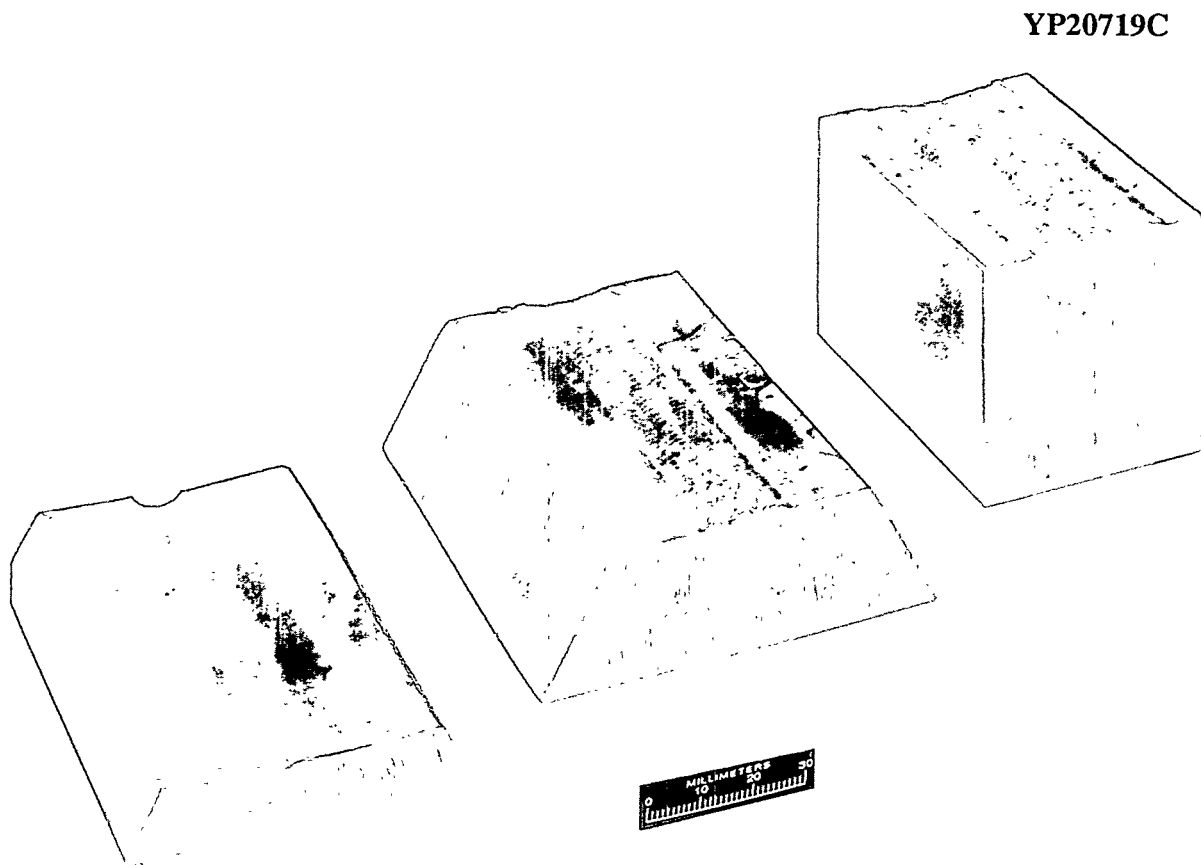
Macroetched surfaces of gas tungsten arc-processed welds in cast slabs of FAPY alloy.
